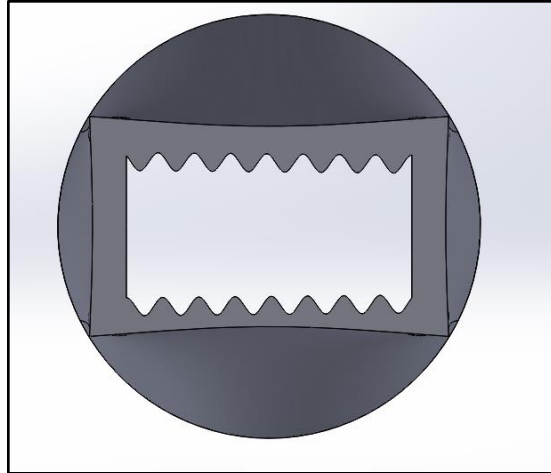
Bottom view, showing the extrusion end of a theoretical Solidworks model illustrating how a sinusoidal nozzle geometry could be used in construction applications to create geometric interlocking between printed layers.
